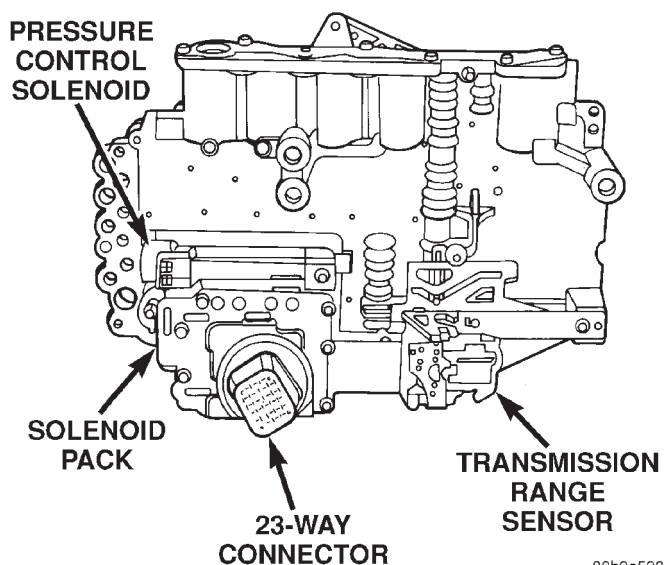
SOLENOID AND PRESSURE SWITCH ASSEMBLY
